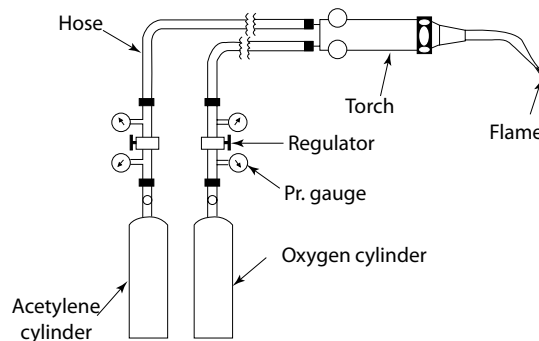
Oxy-acetylene welding circuit
